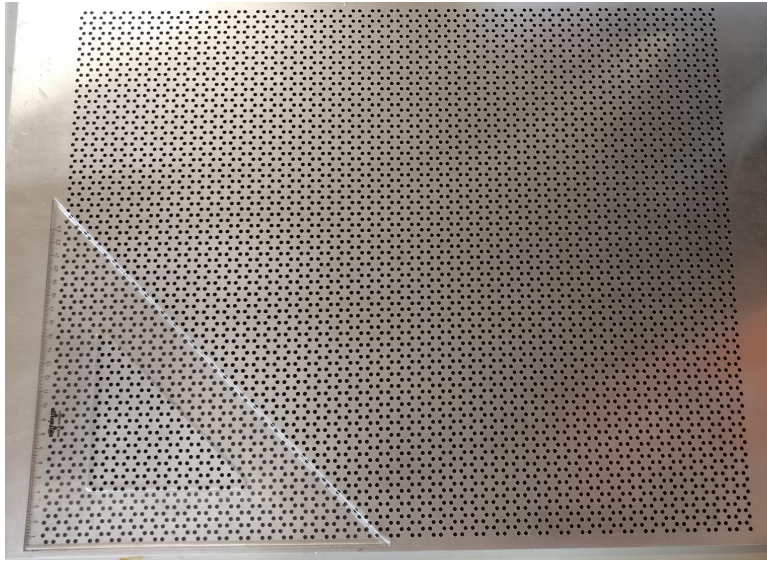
An aluminium alloy honeycomb array sample, fabricated using a CNC machine.
